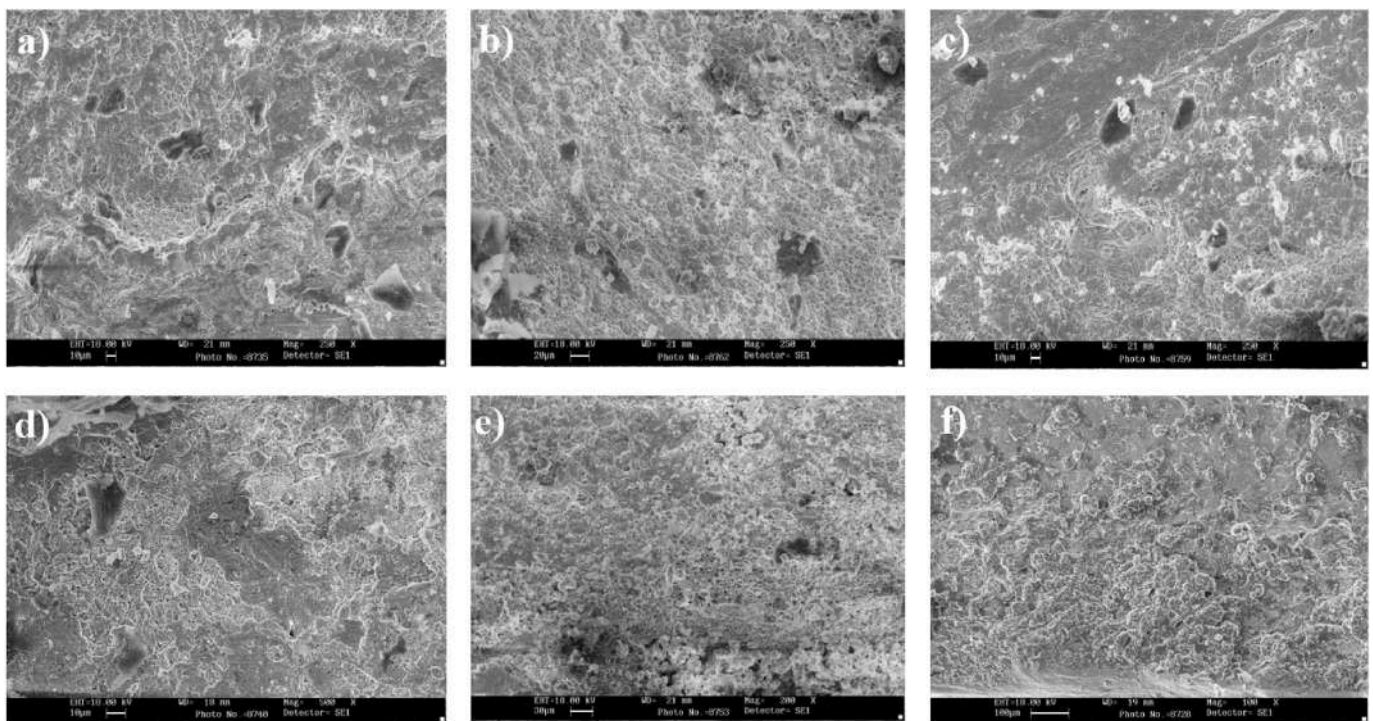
illustrates the of laser power impact on the fracture surface of the tensile test samples on both sides toward each base metal. Fig. 16a–c shows the laser power augmentation impact on the fracture surface toward the duplex side. The depth of cavities notably increased by laser power augmentation up to 450 W. Also, a ductile fracture mechanism with more dimples is observed in Fig. 16b–c. Fig. 16d–f shows the laser power effect on the ASTM B637 alloy side. By increasing the laser power, a ductile fracture mechanism is observed along with bigger core and cavities which demonstrate that the samples have had more plastic deformation toward the ASTM B637 side.
